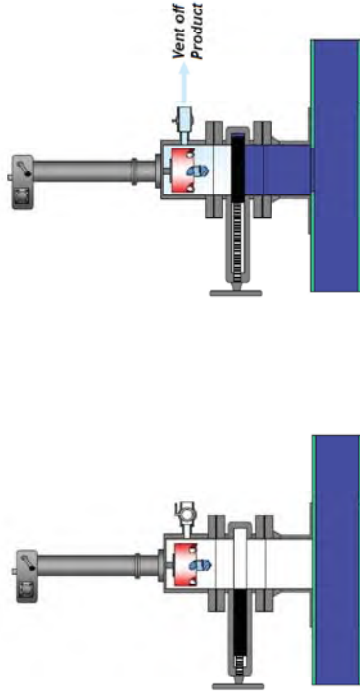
Illustrate the installation of tapping machine on tapping valve (left), and Relieve trapped pressure through bleeder valve after tapping valve is completely closed (right).
